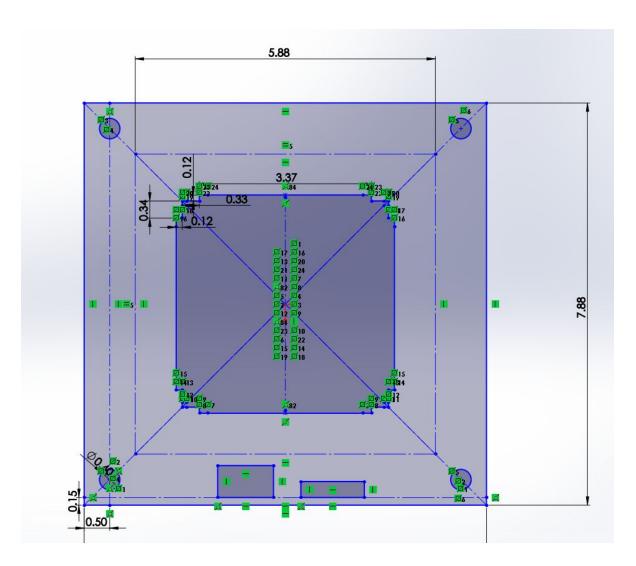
Dimensioned drawing of the mounting plate for OreSat1B. The payload will be mounted on the existing solar panel mounting points. The additional cutout allows the bottom of OreSat1B to slide through the mounting plate.
